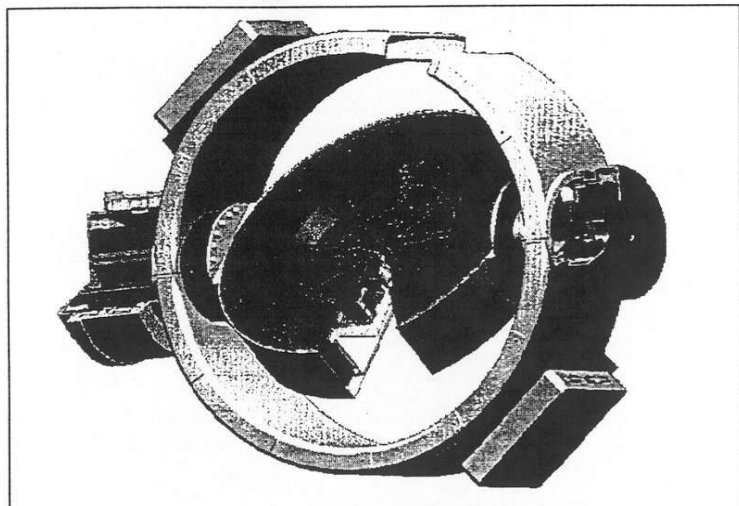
Mini-CMG Phase A design with a magnetic bearings momentum wheel
